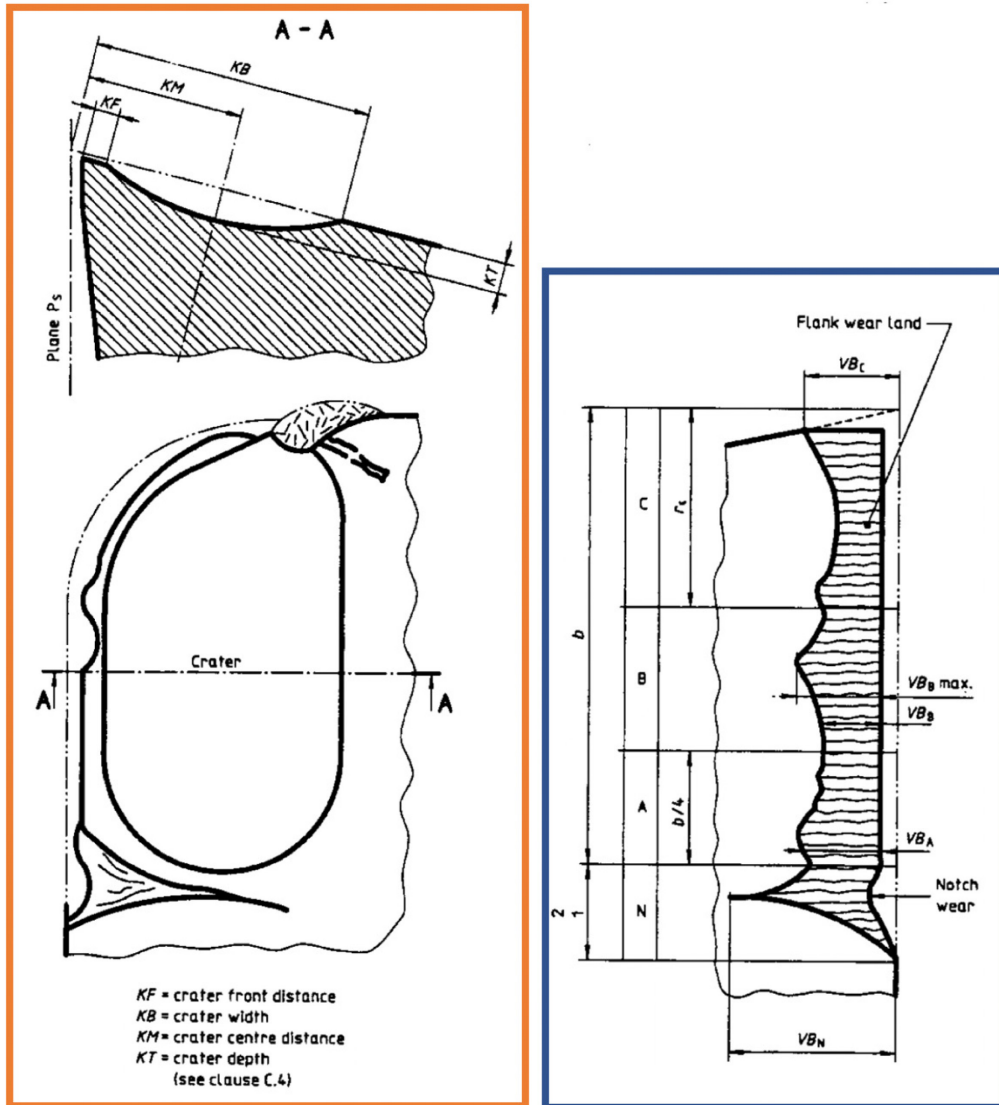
Some types of wear on turning tools. Crater wear (left) and flank wear (right).
